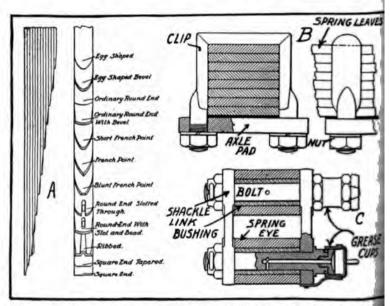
A—Defining Designation of Finishes of Spring Leaf En B—Showing Construction of Spring Retaining Clip. C—Section Spring Shackles Using Lubricated Shackle Bolts.
